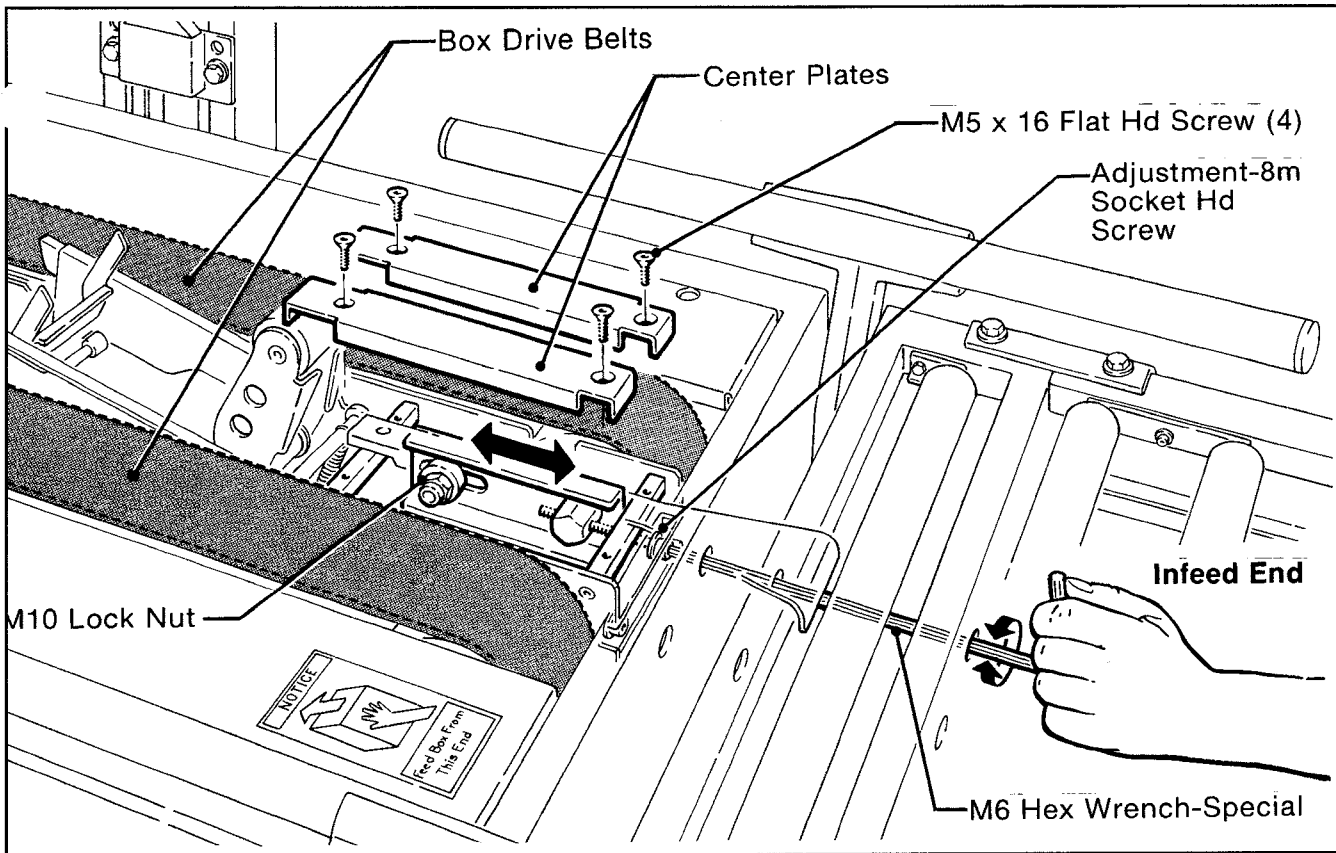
Box Drive Belt Tension Adjustment, Lower Belts (Infeed End)
